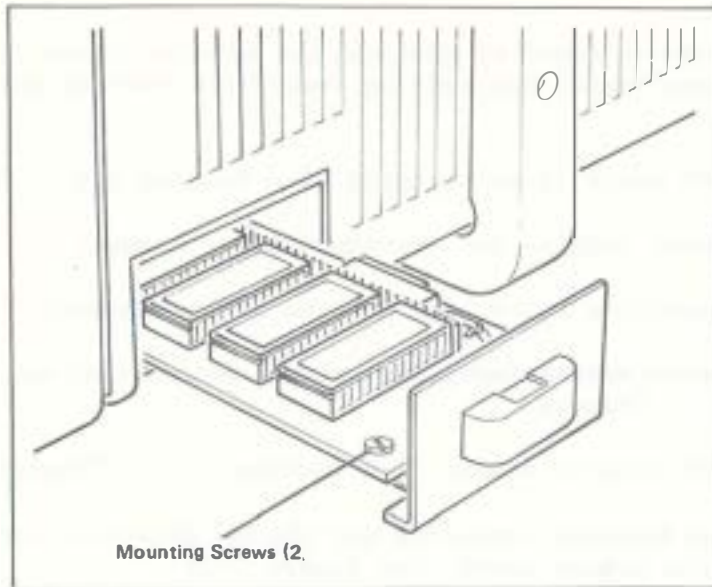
Read Only Memory (ROM) Plug-In Drawer
